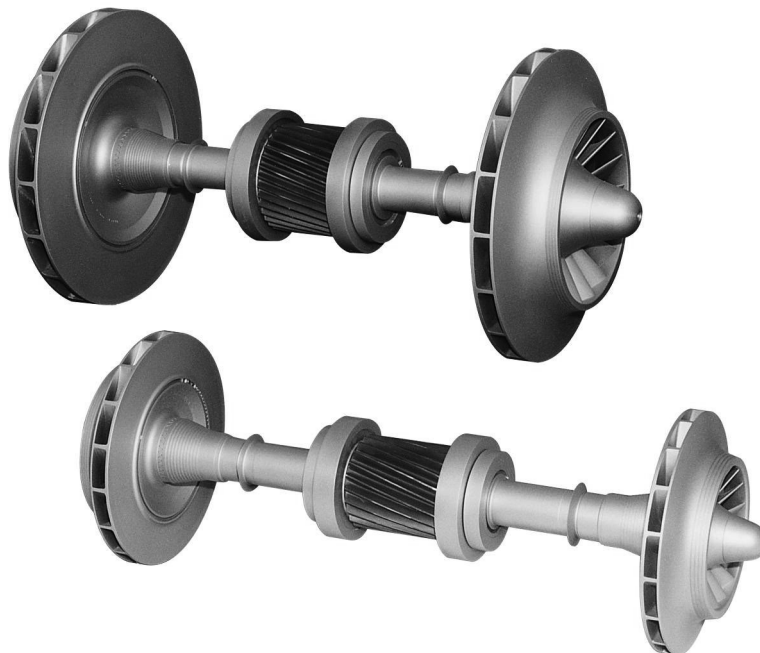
Pinion Rotors from an Integrally Geared Compressor
